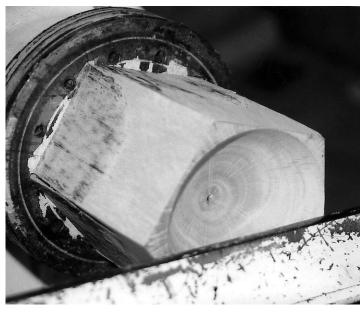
Block mounted on faceplate and hollowed out to near the edges.
